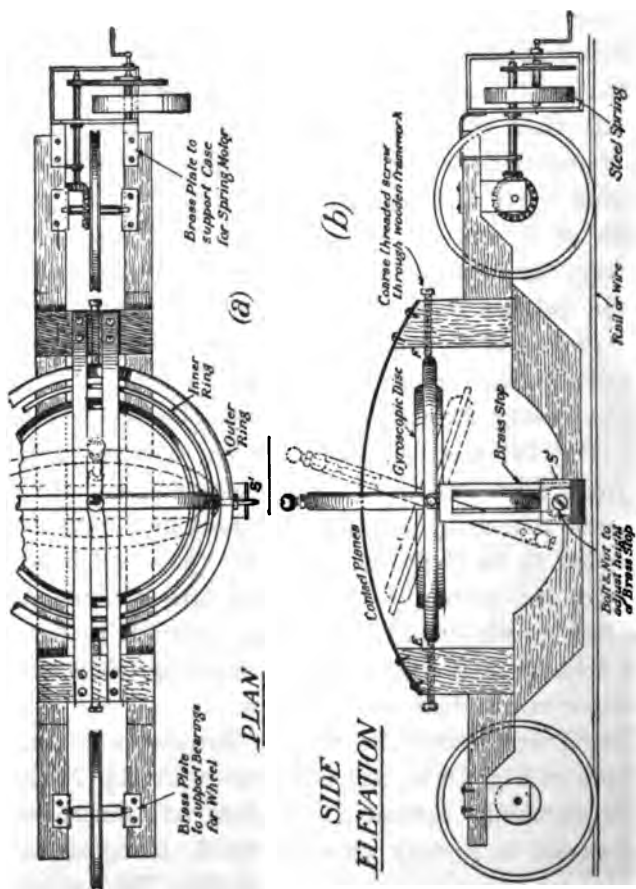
Monorail car. (a) Plan. (b) Side elevation. About $\frac{2}{3}$ full size.
